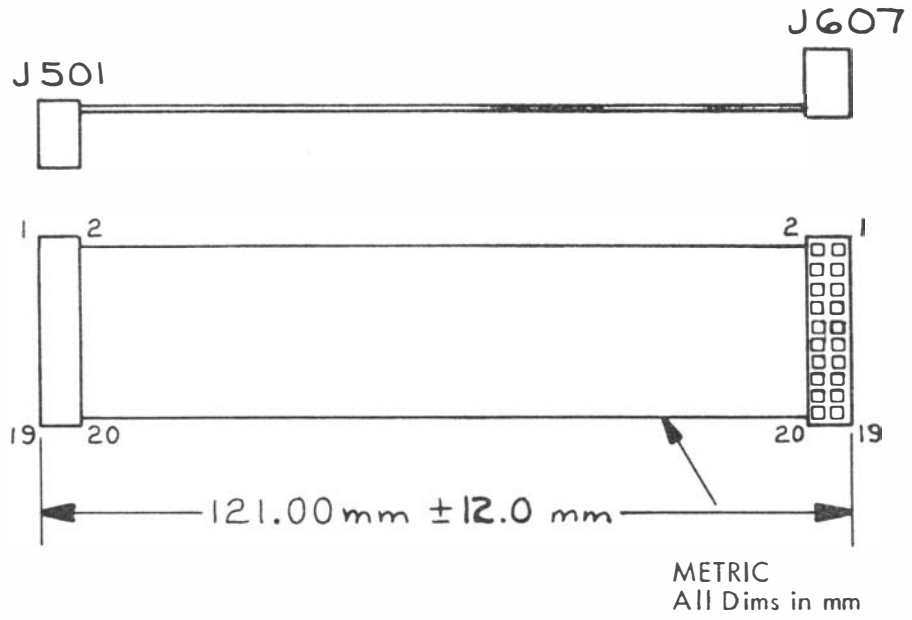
Keyboard-to-Motherboard Cable Assembly (P/N 47112)
